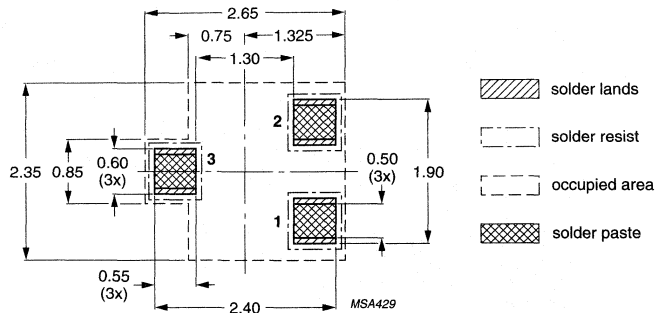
Reflow soldering footprint for SOT323 (SC-70).
